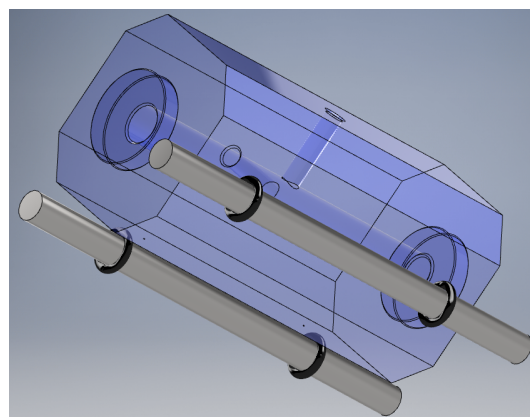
The next design of reference cavity with a part of the support system (bottom view; CAD drawing).
